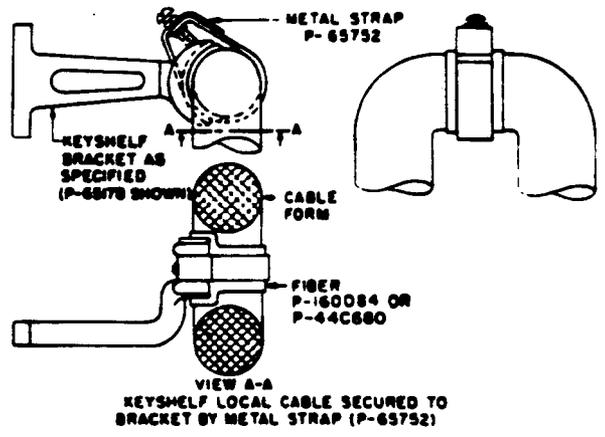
FASTENING KEYSHEAF LOCAL CABLES TO BRACKETS (PAR. 3.423)
